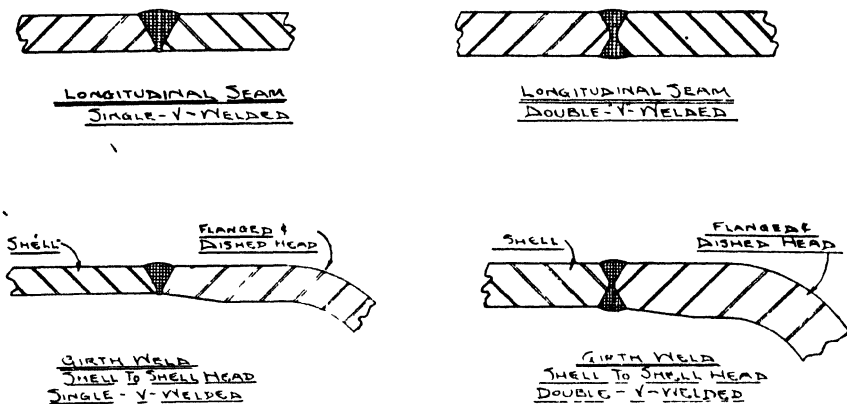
Typical details of longitudinal and girth seams for welded storage heaters.
